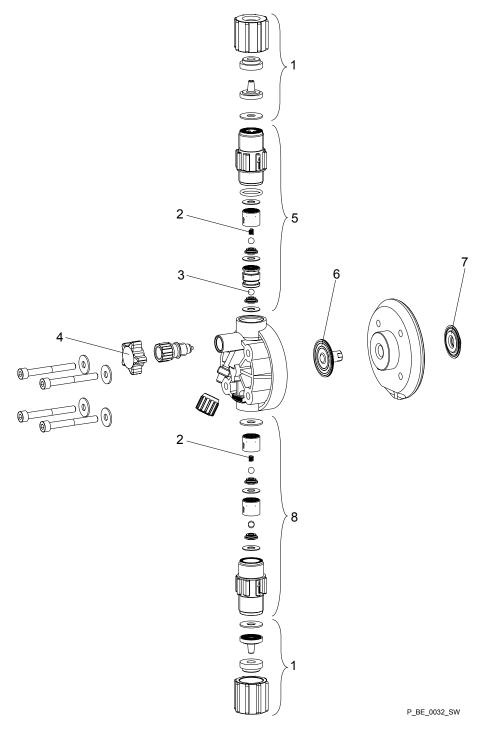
Liquid end gamma/ L 1005 (1605) PVT with bleed valve
